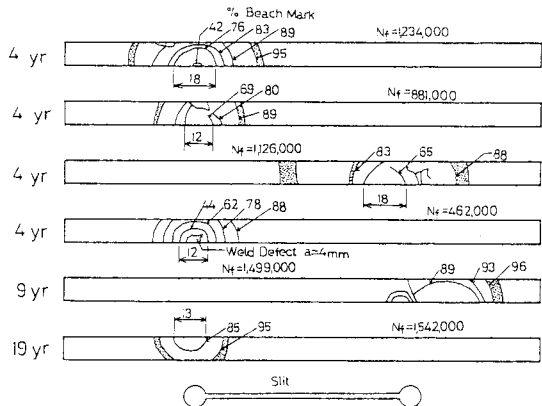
Fatigue fracture surfaces of groove-welded specimens. (Specimen G)
